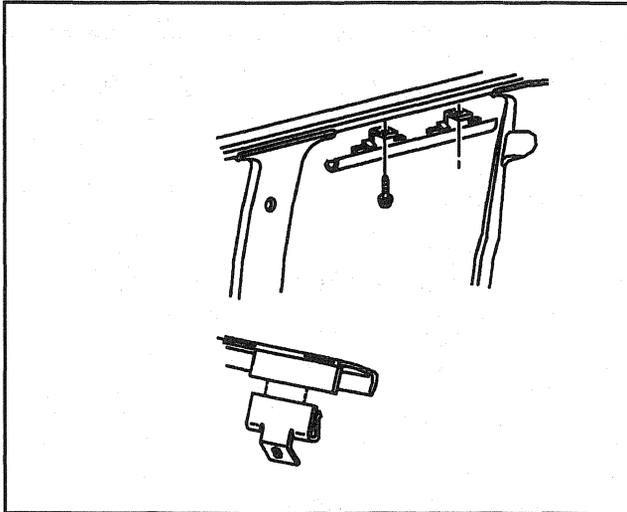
Rear Side Door Upper Garnish Molding Replacement
